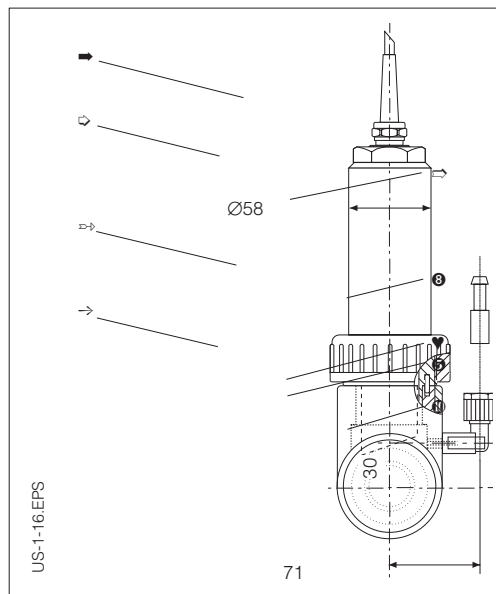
CUA 250-A/-B with spray head CUR 3-1
